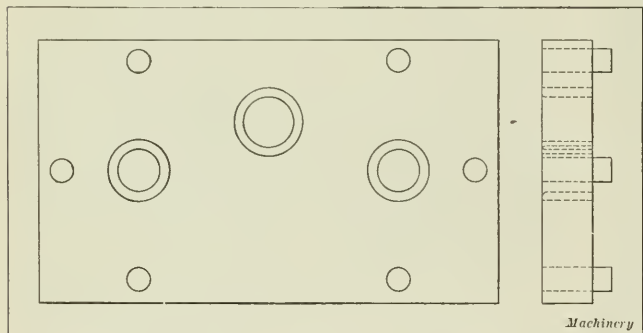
Suitable Jig for making Piece shown in Fig. 8 in Small Quantities
